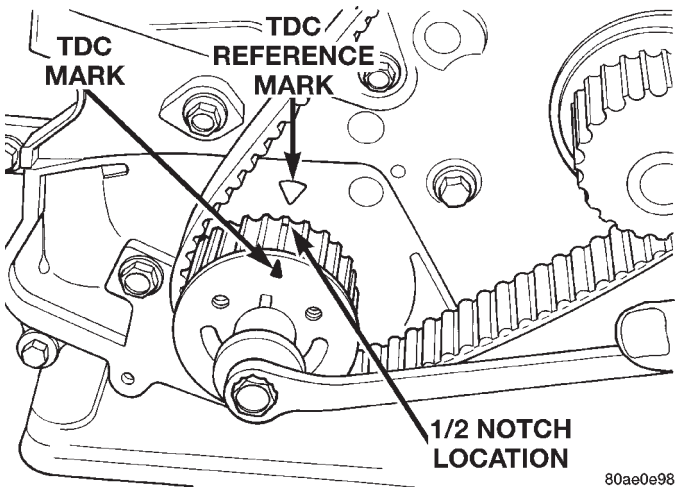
Adjusting Crankshaft Sprocket for Timing Belt Installation
